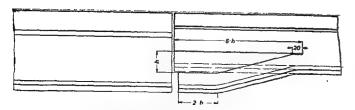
Welding preparations on a transition joint by adjusting the smaller rail section to the bigger one.
